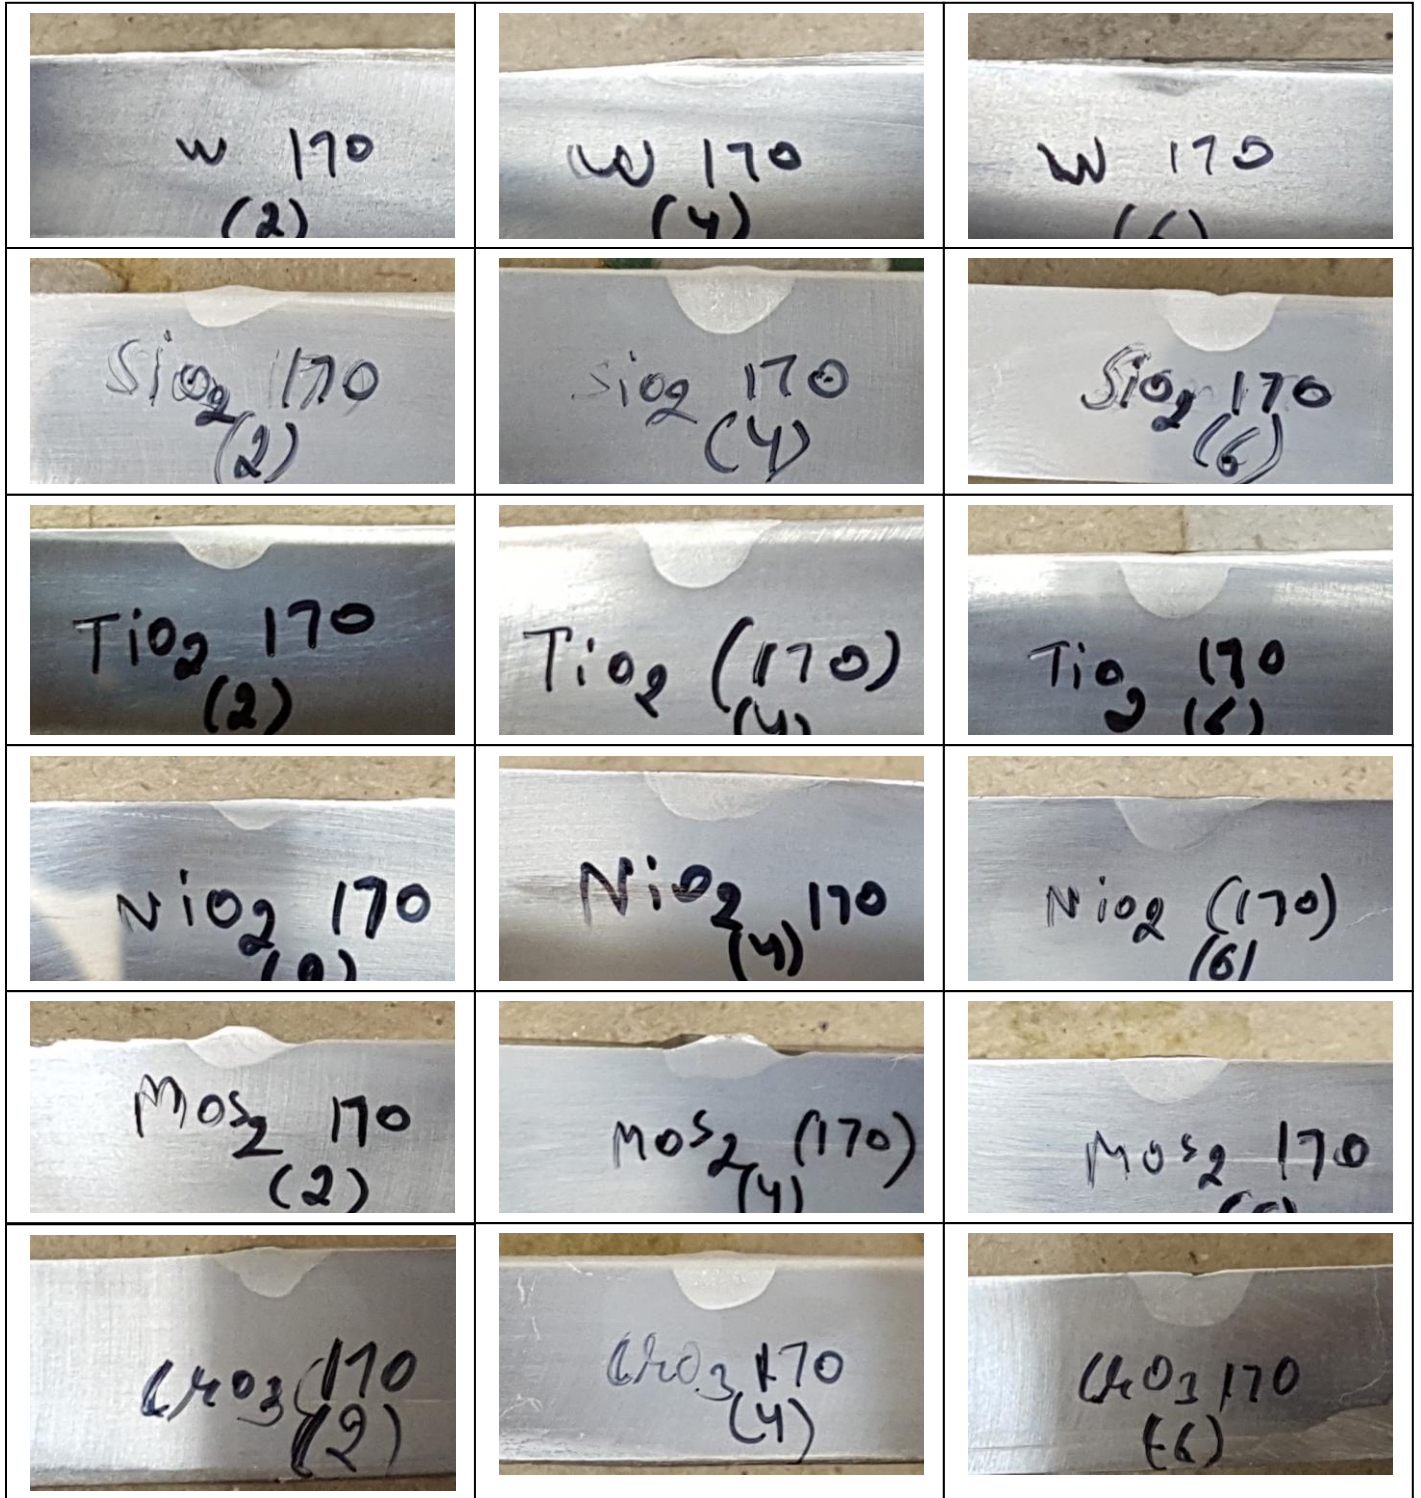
Bead appearance for TIG and ATIG welding samples for 2 sec, 4 sec and 6 sec at current- 170 A
